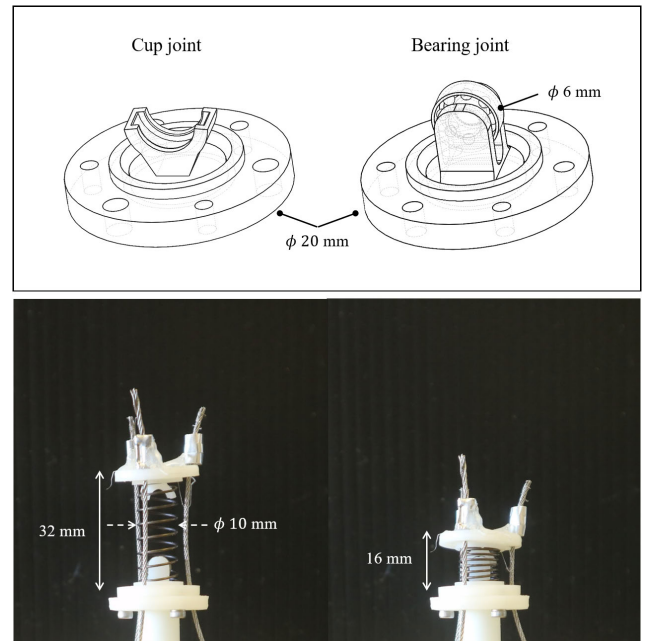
Prototype joint dislocation mechanism. For simplicity, we use a bearing and a cup in the joint.
